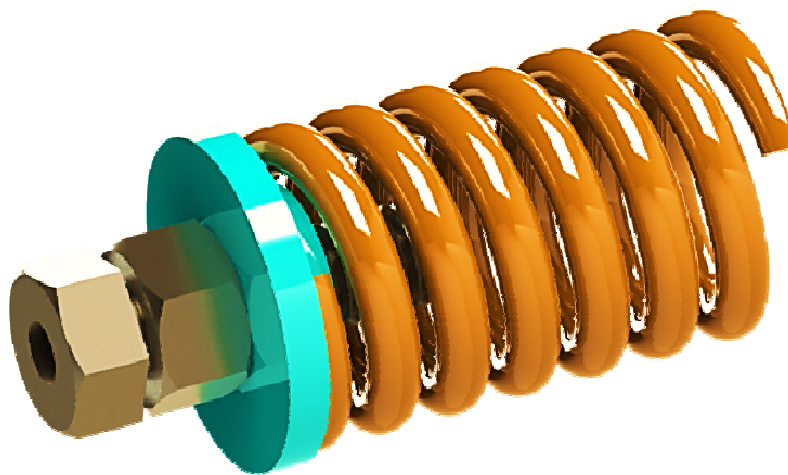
SPRING, SPRING CAP AND BARREL ADJUSTER
